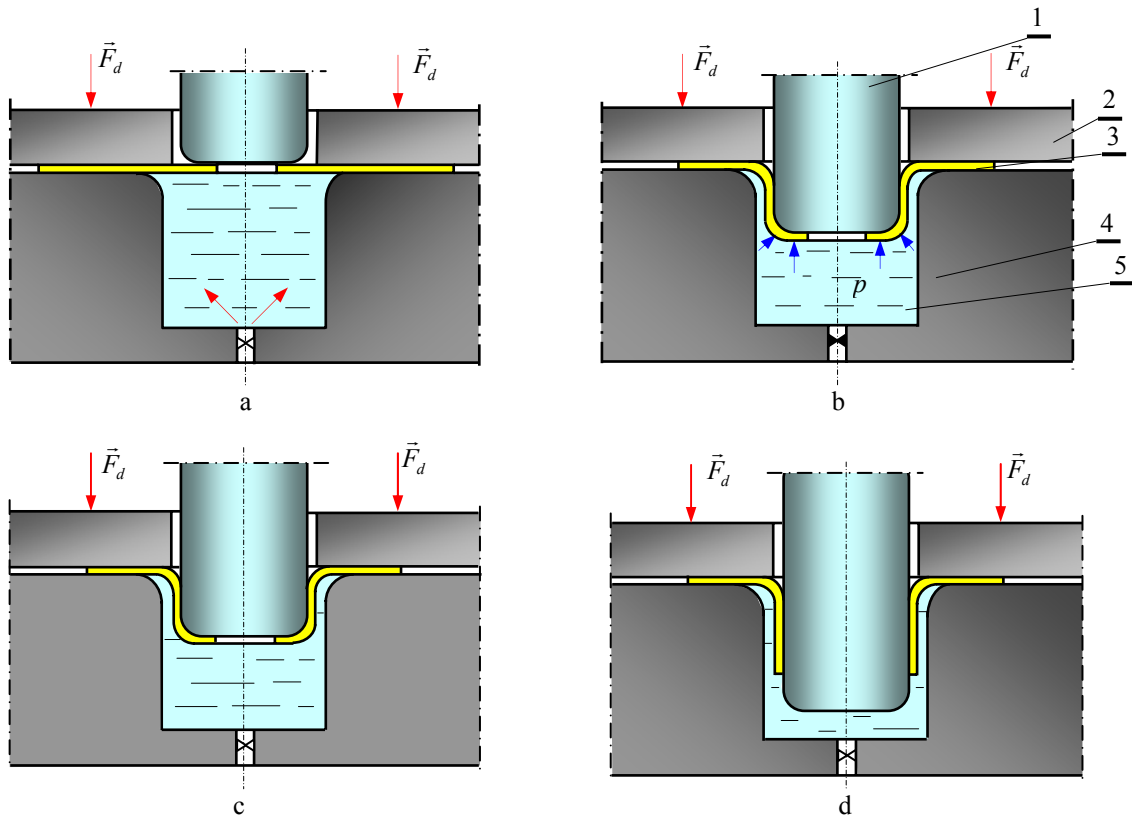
Tool for combined drawing: 1 - punch; 2 - blank holder; 3 - blank; 4 - die; 5 - fluid
